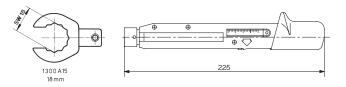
Torque wrench 4 \dots 20 N·m Type 1300A39 and open ended insert tool Type 1300A15 (18 mm) or 1300A33 (16 mm)
